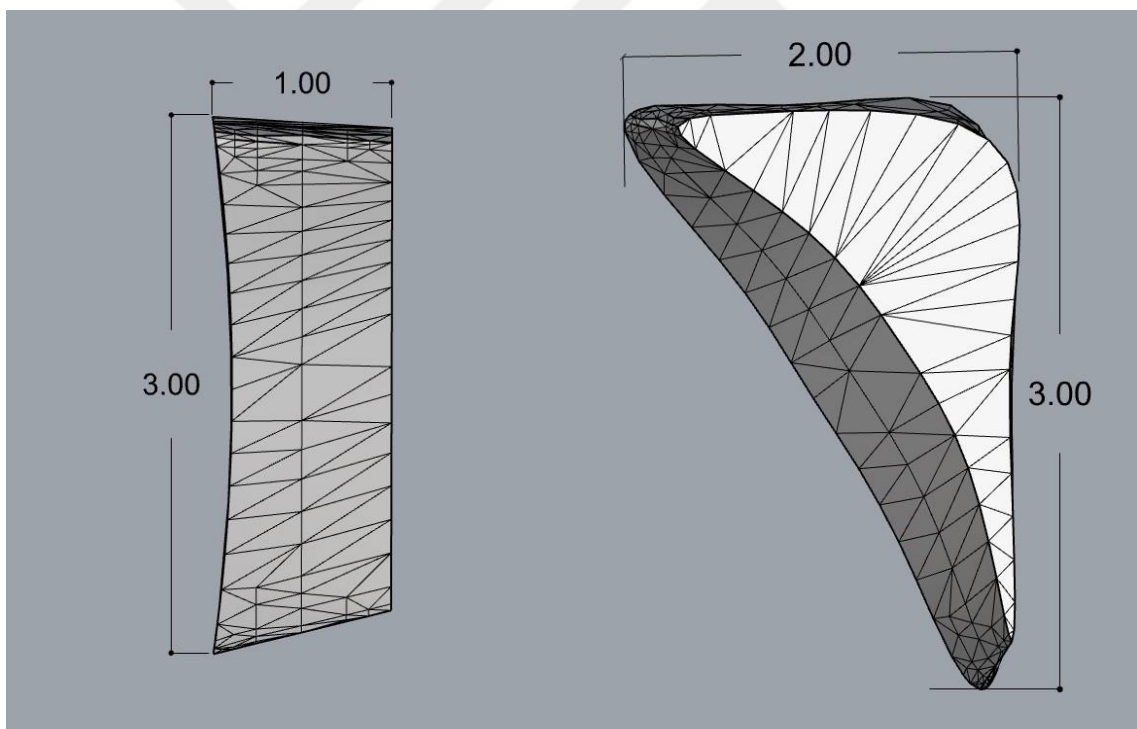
F. Dimensions of Optimized Rotation attachment.
